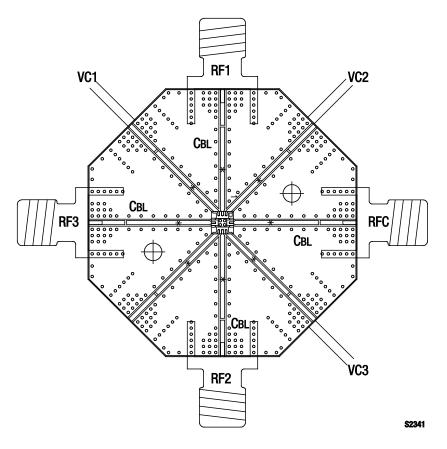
SKY13398-000 Evaluation Board Assembly Diagram
